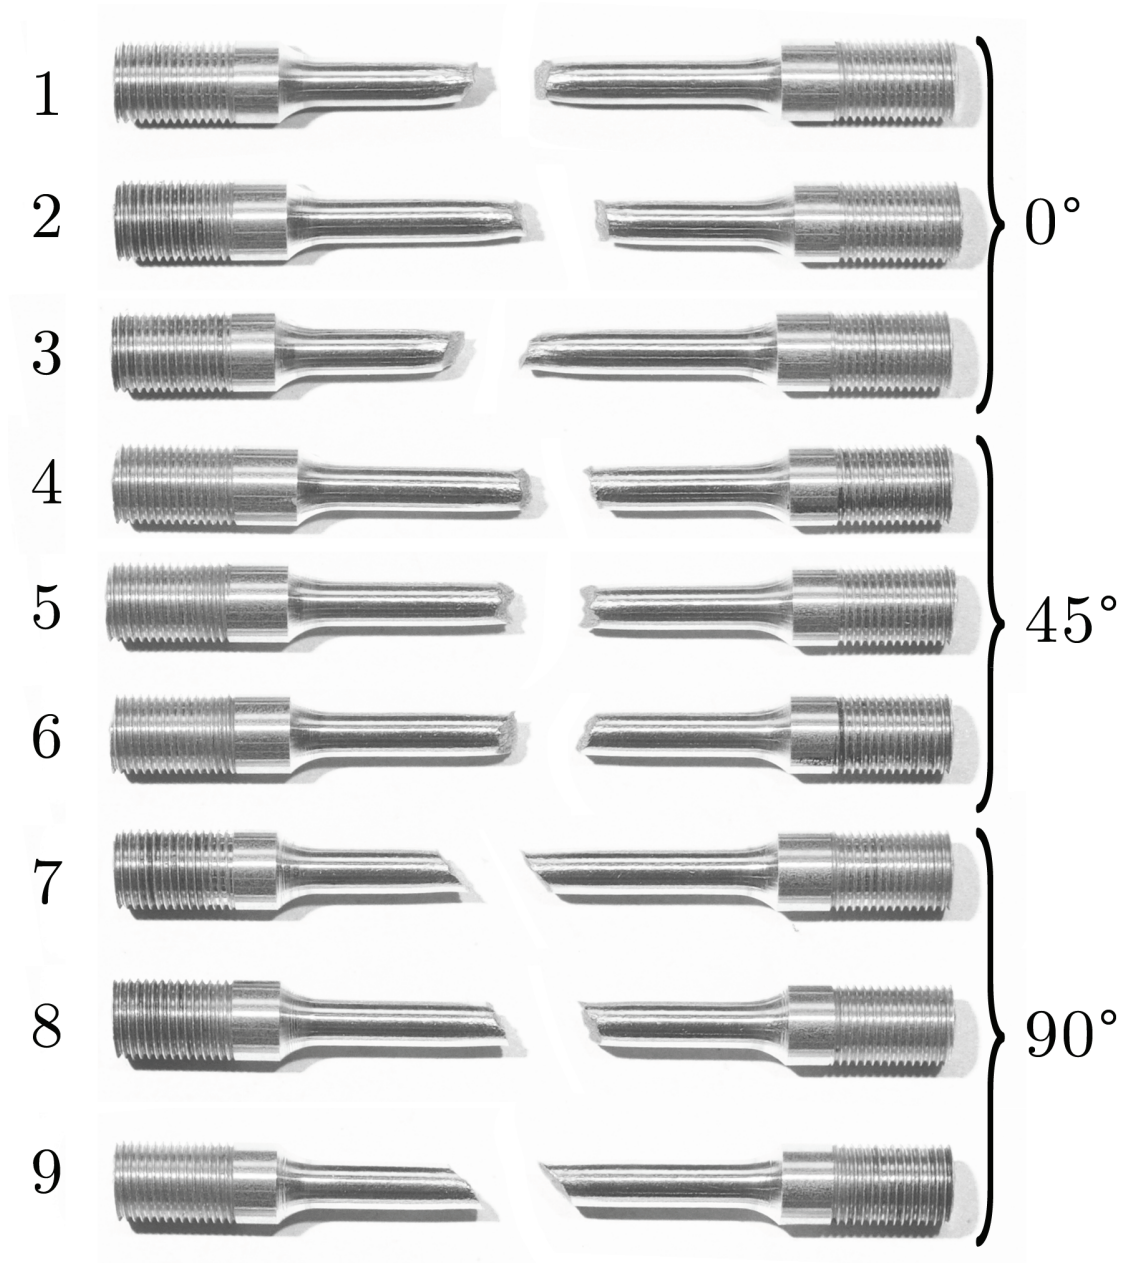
Tensile specimens post fracture for all AA6070-T7 tests.
